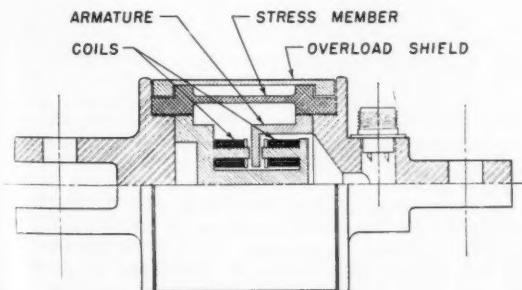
This drawing shows the design of the strain unit used in the electric drawbar dynamometer
